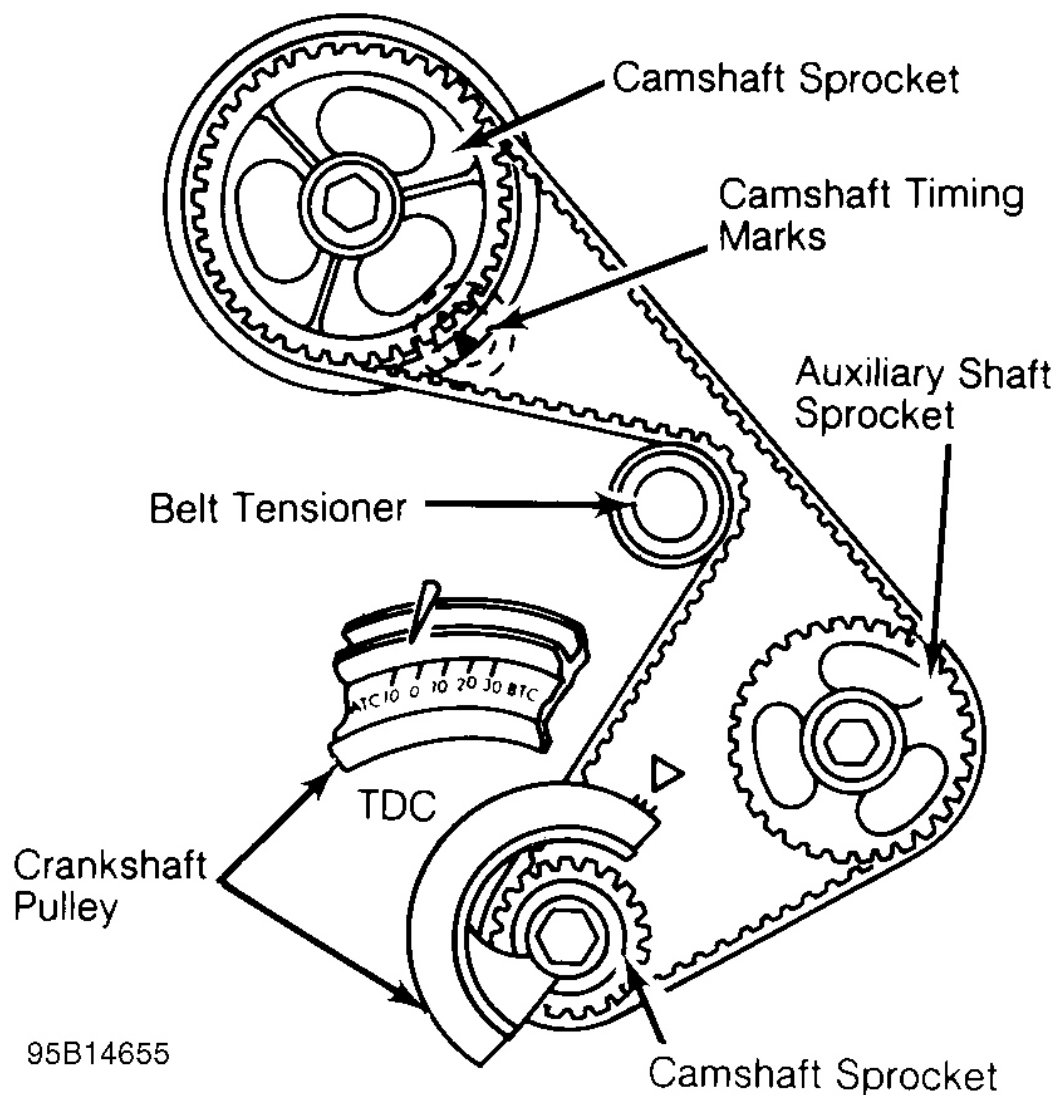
Typical Camshaft Belt Sprocket Alignment
